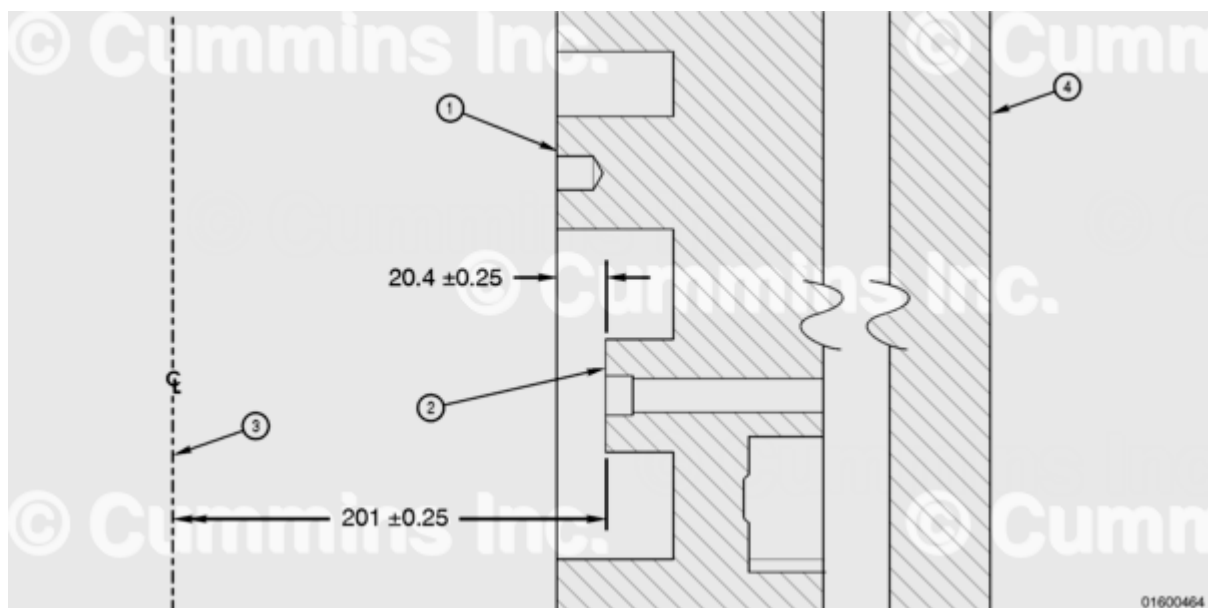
Lower Piston Cooling Nozzle (Oil Feed) (1) Primary Reference Datum (locating pad), (2) Surface to be Machined (mounting pad), (3) Alternate Datum (crankshaft centerline), (4) Cylinder Head Deck (parallel to locating pad and mounting pad).
